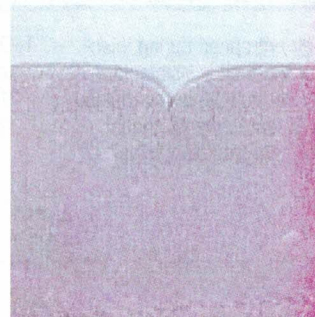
Weld line notches; transmitted light, polished, magnification 560:1
